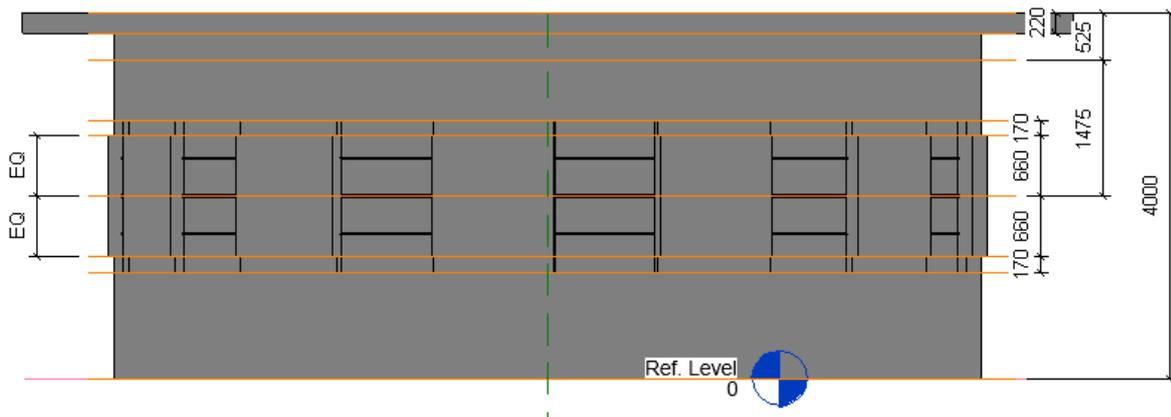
Front view of the stator frame showing the reference planes for the cooler surfaces.
